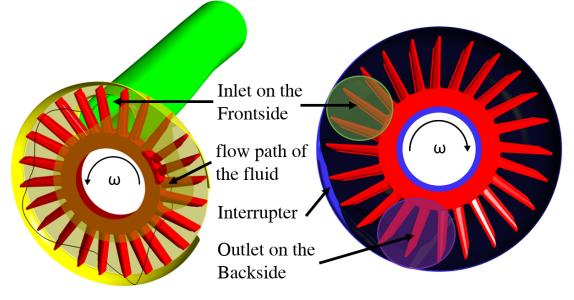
Flow path of a fluid particle through the impeller of the side channel pump (left). Axial sectional view of the impeller (right).
